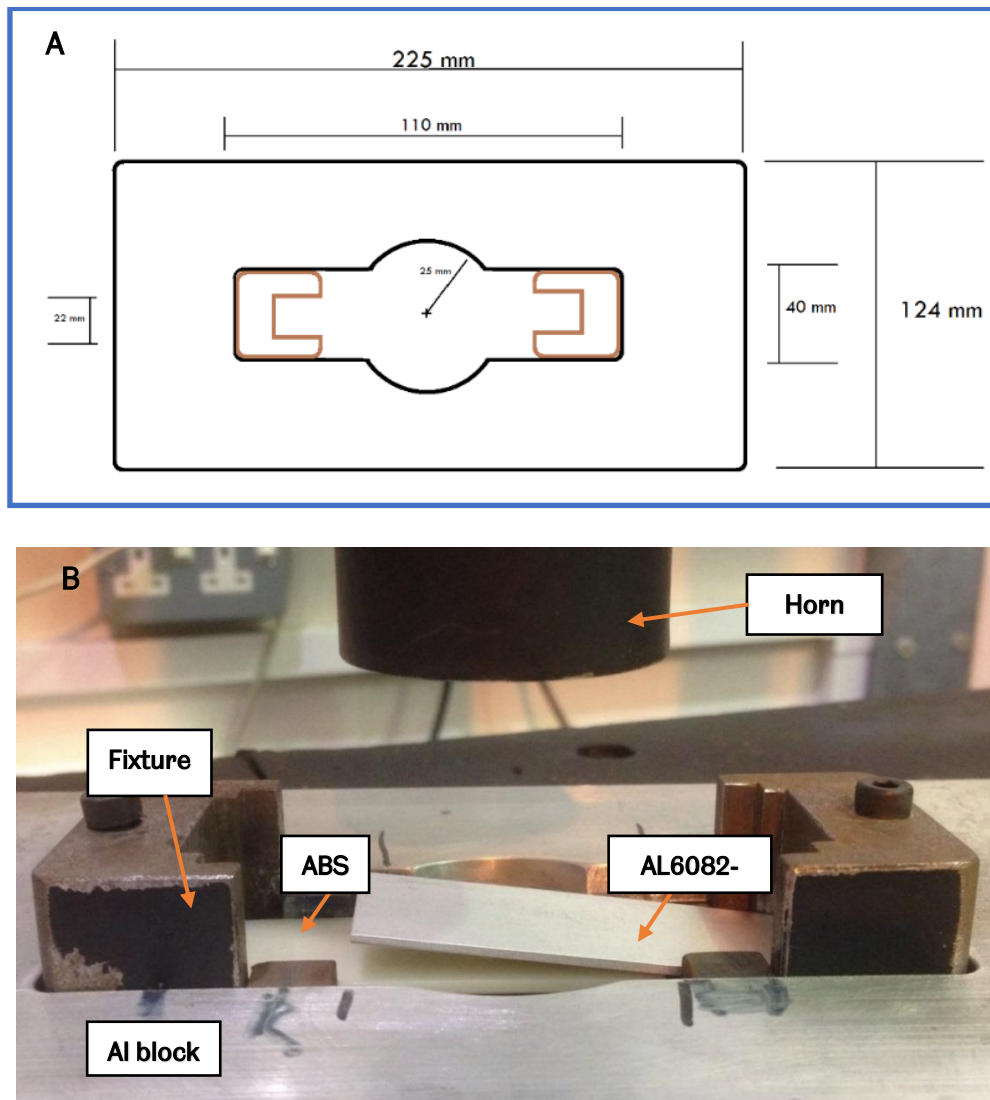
Fixing tool system A) dimensions of the tools, thickness of block is 6 mm, B) installation of the tools.
